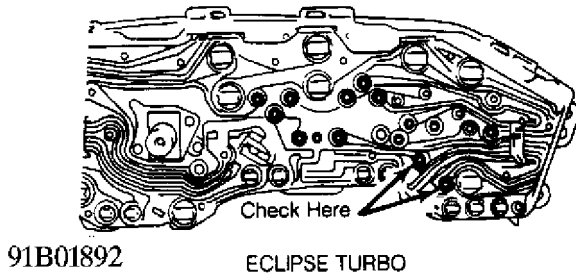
Boost Pressure Gauge Test Terminal ID (Eclipse Turbo)
